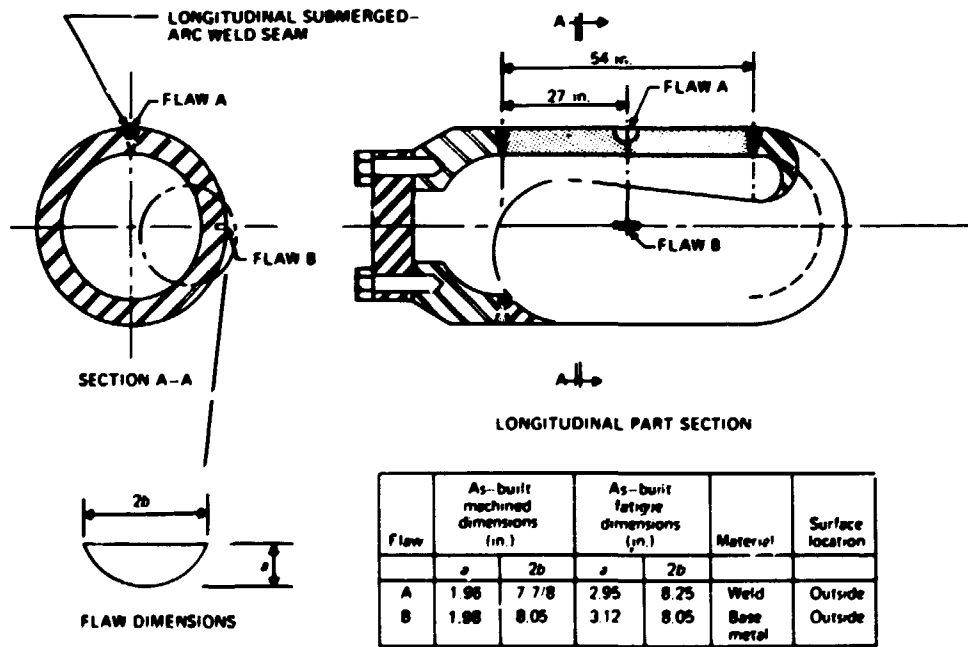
Sketch showing flaw locations and as-built flaw size for intermediate test vessel V-4.
